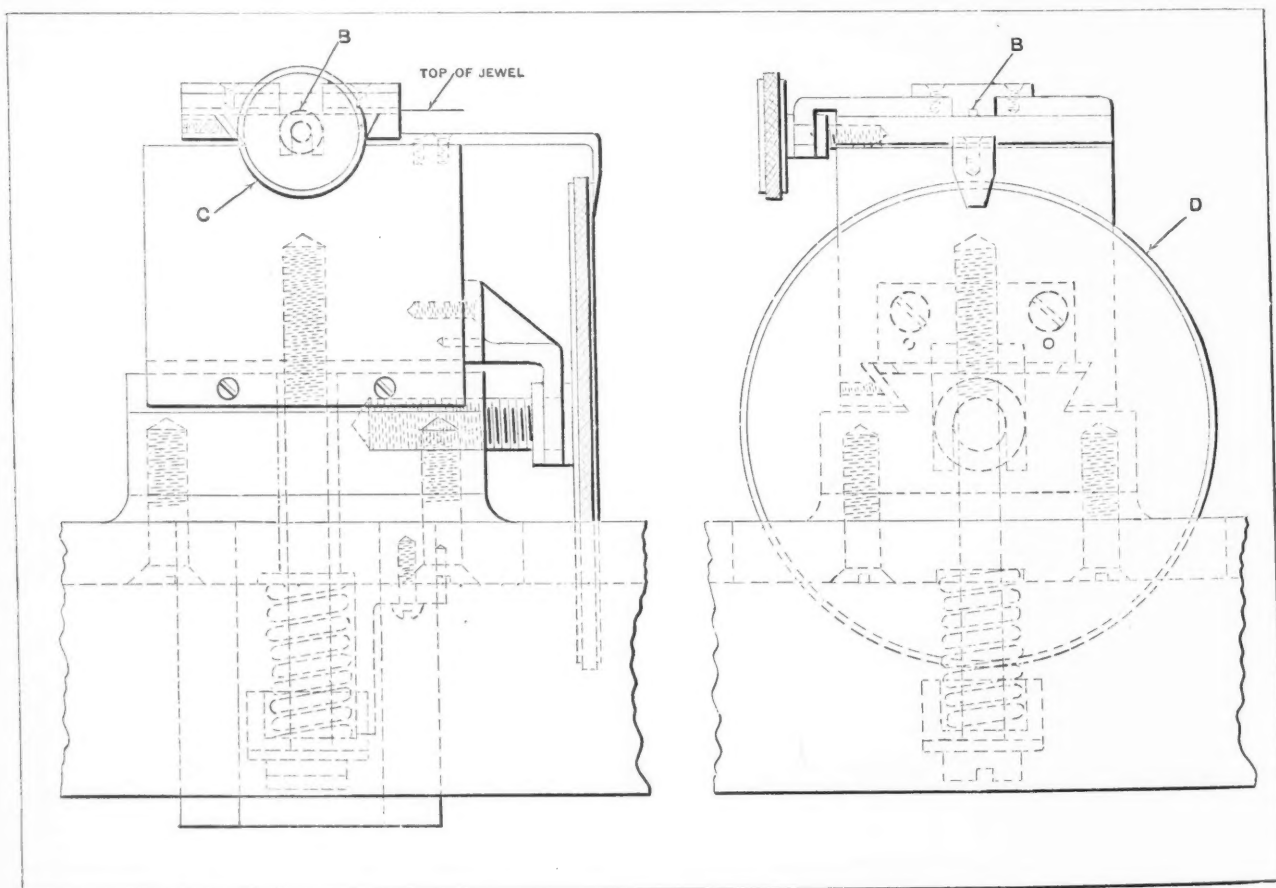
Front and Side Views of Holder Shown in Fig. 7
